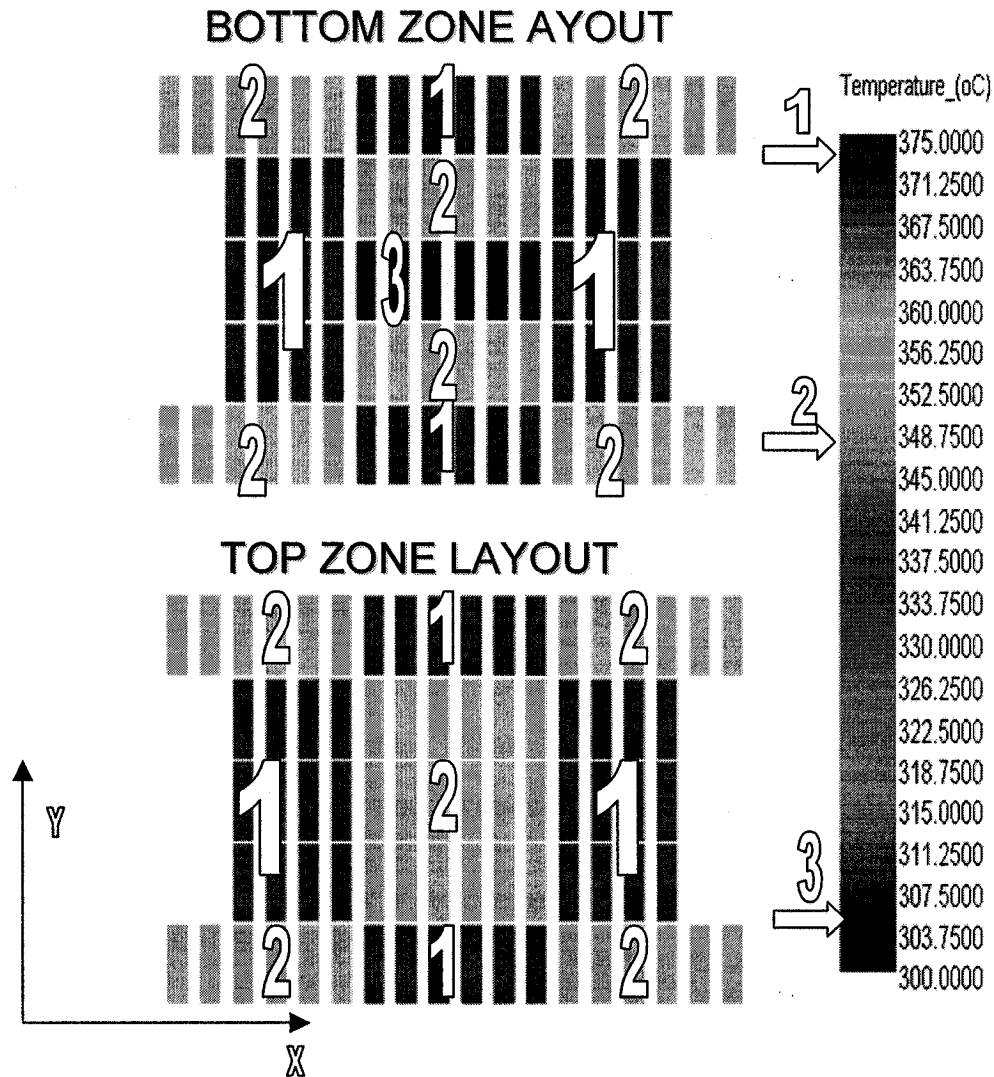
Oven layout for Monark thermoforming machine (oven B)
